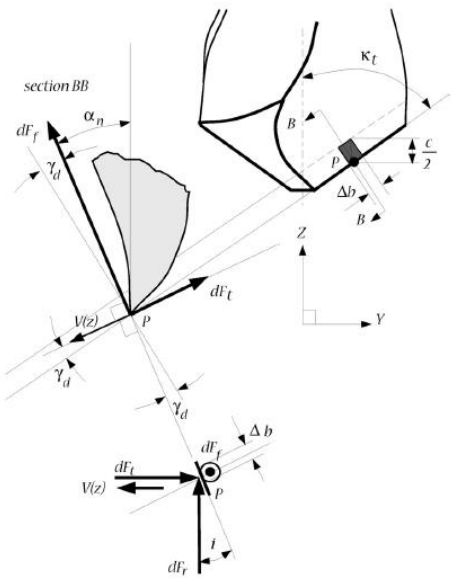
Detail of cutting edge and cutting forces of twist drill (Altintas, Manufacturing Automation: Metal Cutting Mechanics, Machine Tool Vibrations, and CNC Design, 2012)
